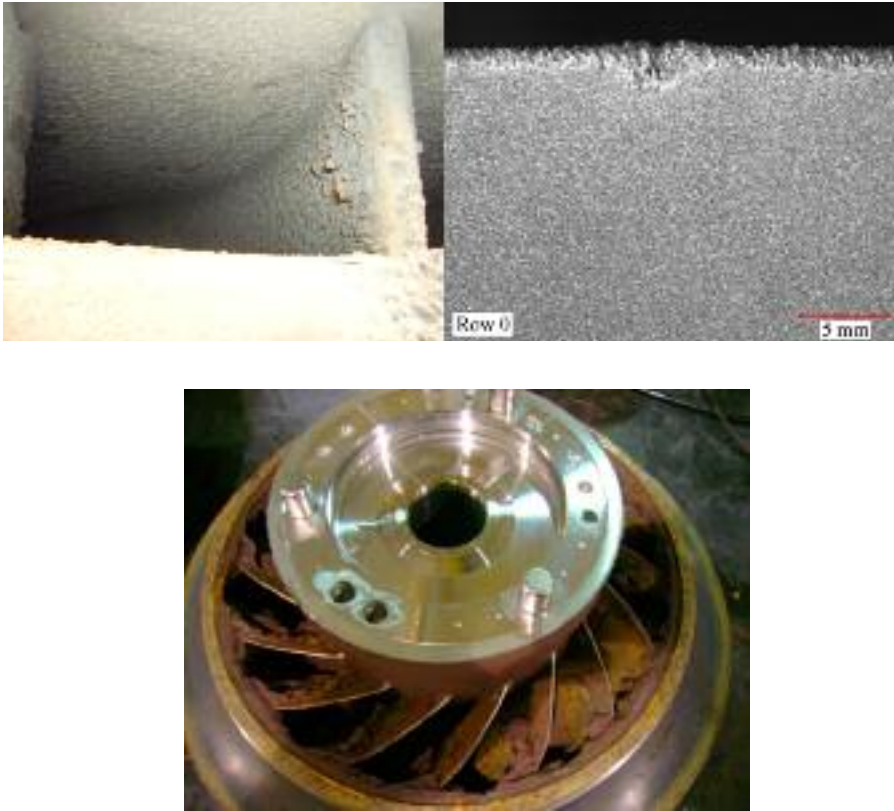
Result of particle admission: (top left) fouled compressor inlet guide vanes, (top right) first stage compressor blade leading edge erosion and (bottom) heavily fouled centrifugal compressor impeller.
